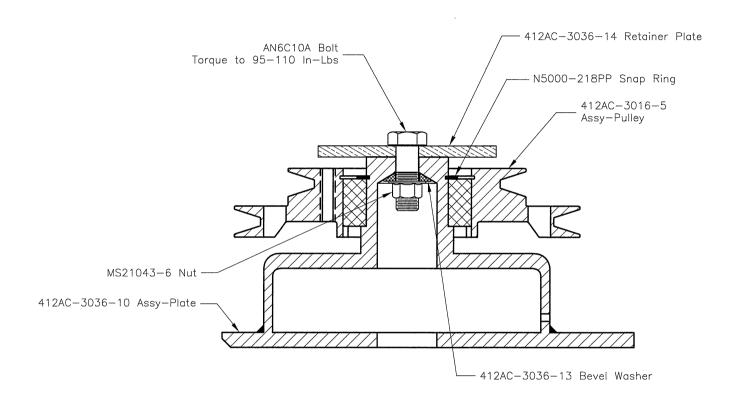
, 412 Air Conditioner Speed Reducer Assembly
